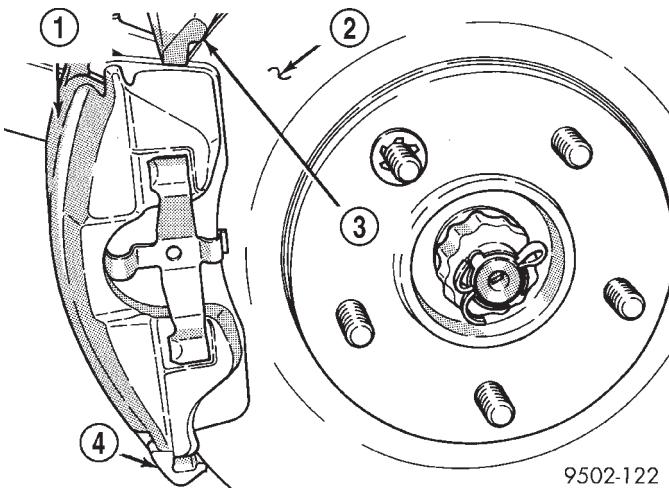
Caliper Mounting On Steering Knuckle (Typical)
